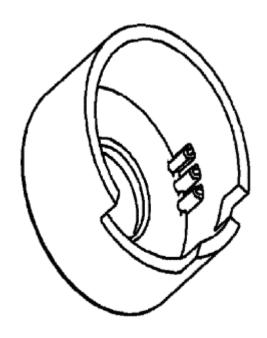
1.8L SPROCKET HOLDER 9711 Courtesy of CHRYSLER LLC
